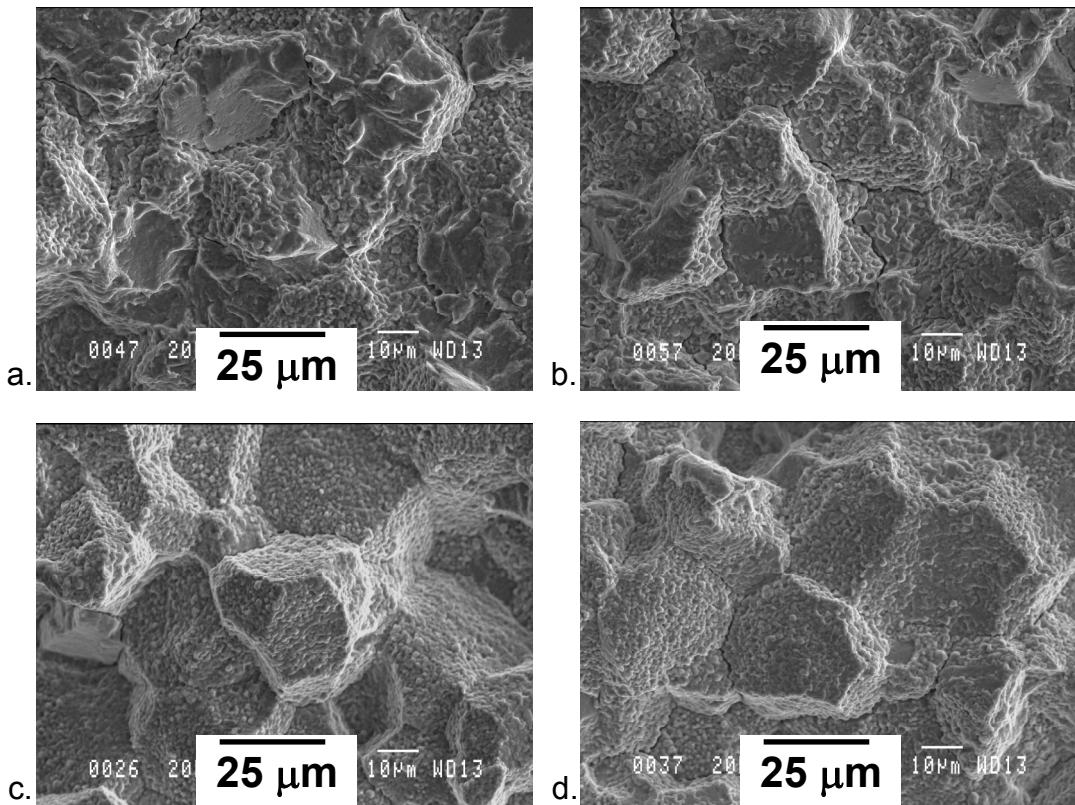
Fatigue cracking of supersolvus 90 s dwell fatigue crack growth specimens tested at:
